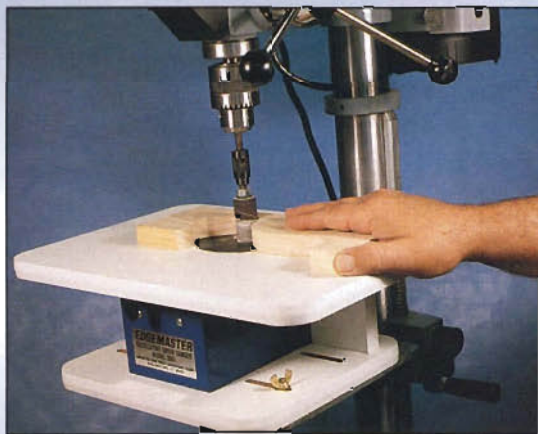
On the Edgemaster, rotary drum motion drives an oscillating mechanism housed inside the unit's base to produce the dual sanding action.
